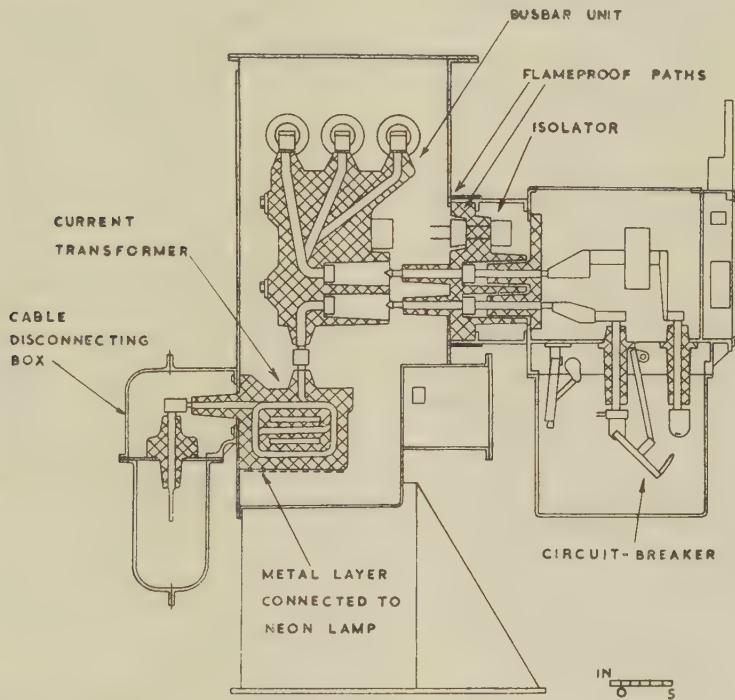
Indoor oil-break flameproof switchgear unit, 400 amp 6·6 kV 75 MVA, showing resin parts.
